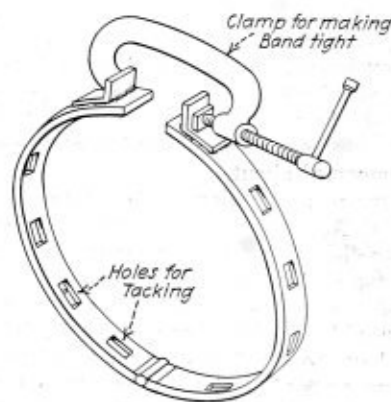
Clamp for lining up sections for girth welds
